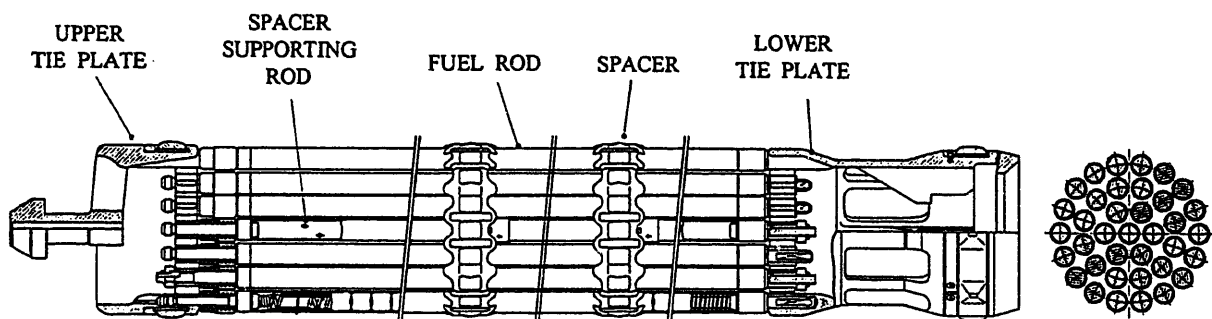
Schematic drawing of an ATR 36-rod fuel assembly
